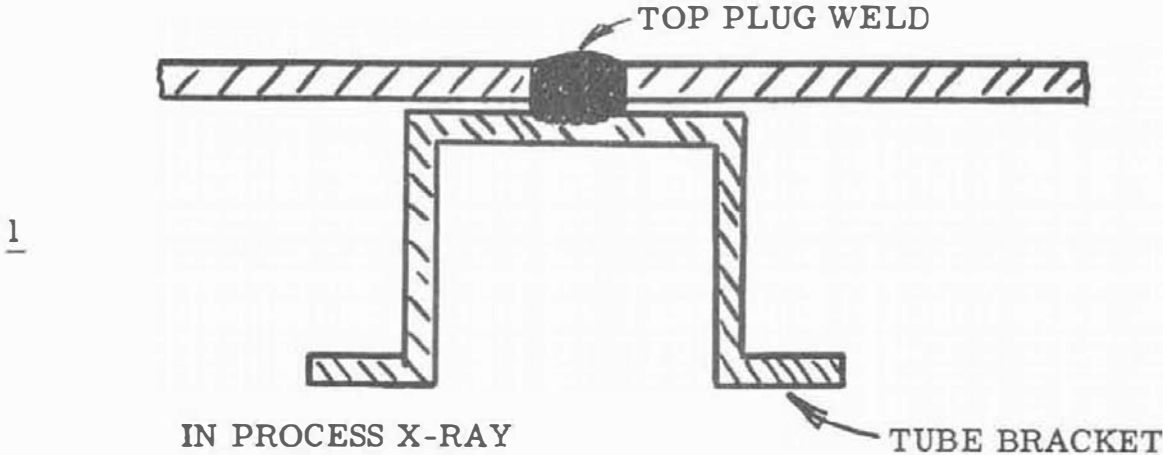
GAS BEARING HEAT EXCHANGER WELD DIAGRAM
